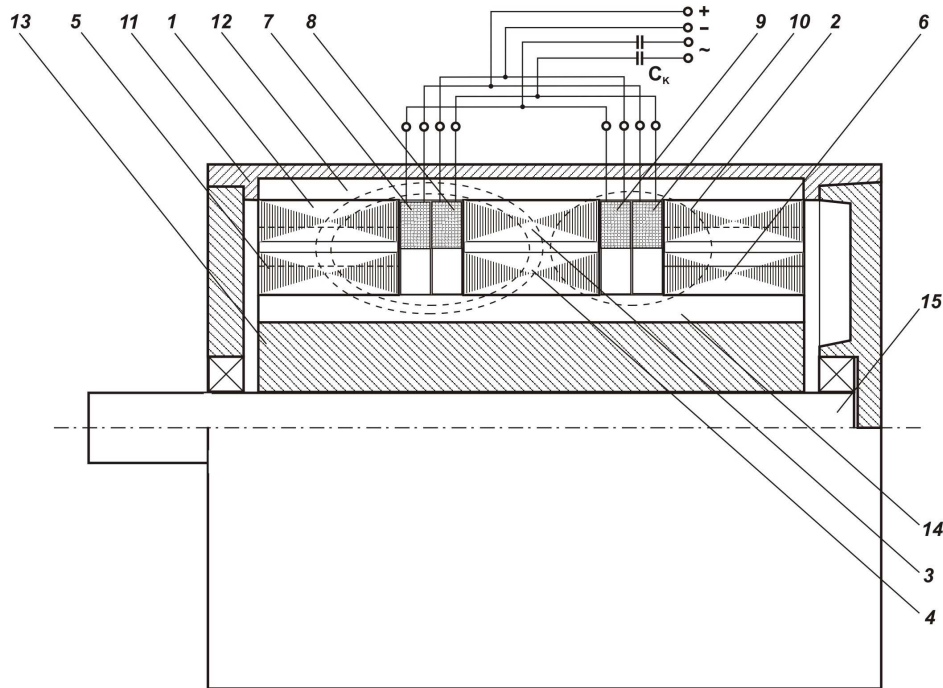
The design of reactive generator: 1-6 – laminated stator and rotor packets; 7-10 – rotor coils; 11, 13 – aluminium alloy body of stator and rotor; 12, 14 – laminated inserts in enclosures of stator and rotor; 15 – shaft; C_K – compensating capacitors
